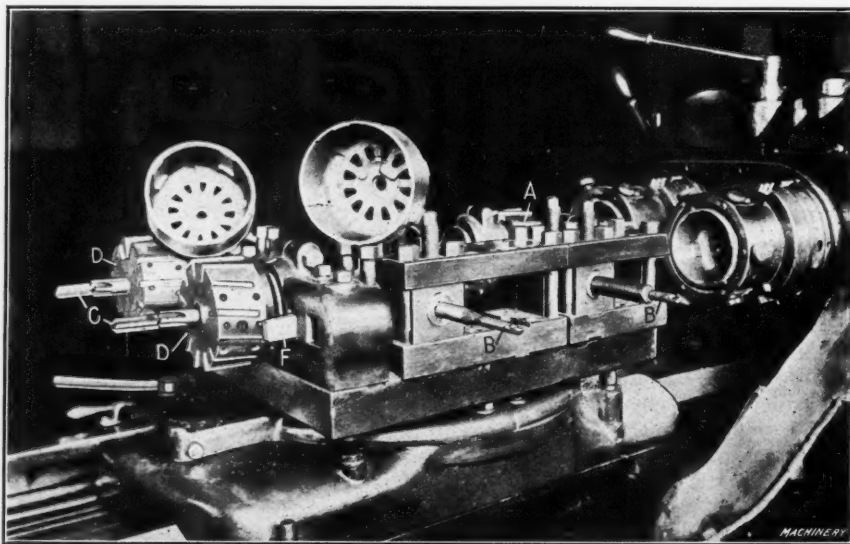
Close View of Jones & Lamson Double-spindle Flat Turret Lathe showing the Turret Tools, Chucks and Work
